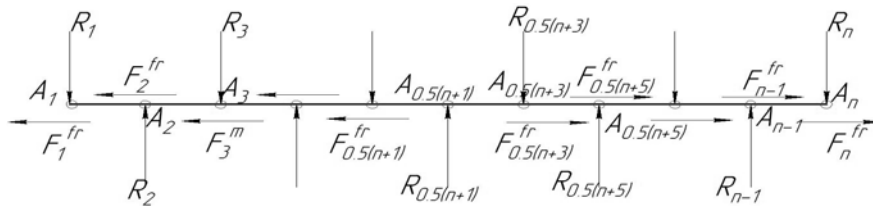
The scheme of action of forces on the sheet workpiece during stamping process.
